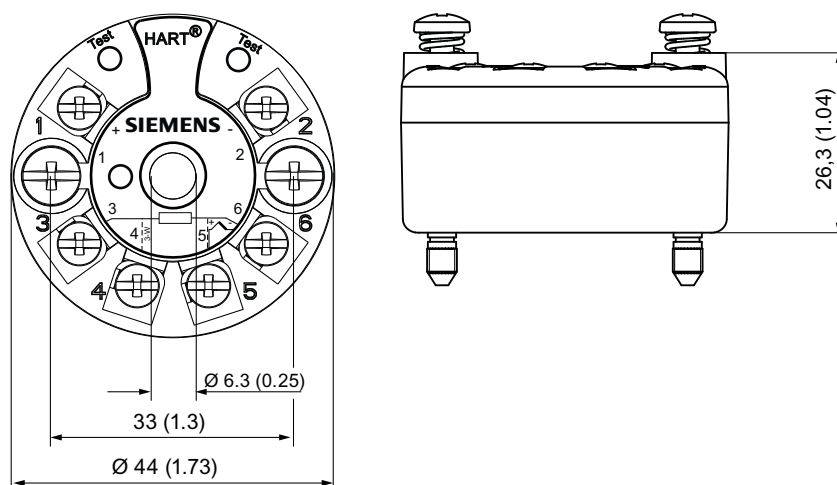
SITRANS TH200/TH300, dimensions in mm (inch)
